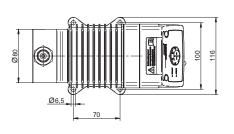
Dimensioned drawing of MEMDOS SMART LB 2, 5, 10 with dosing head made of stainless steel (1.4571) (all dimensions in mm)
